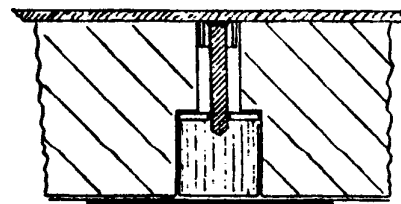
Installation of solid-pin flux type of welding stud.
